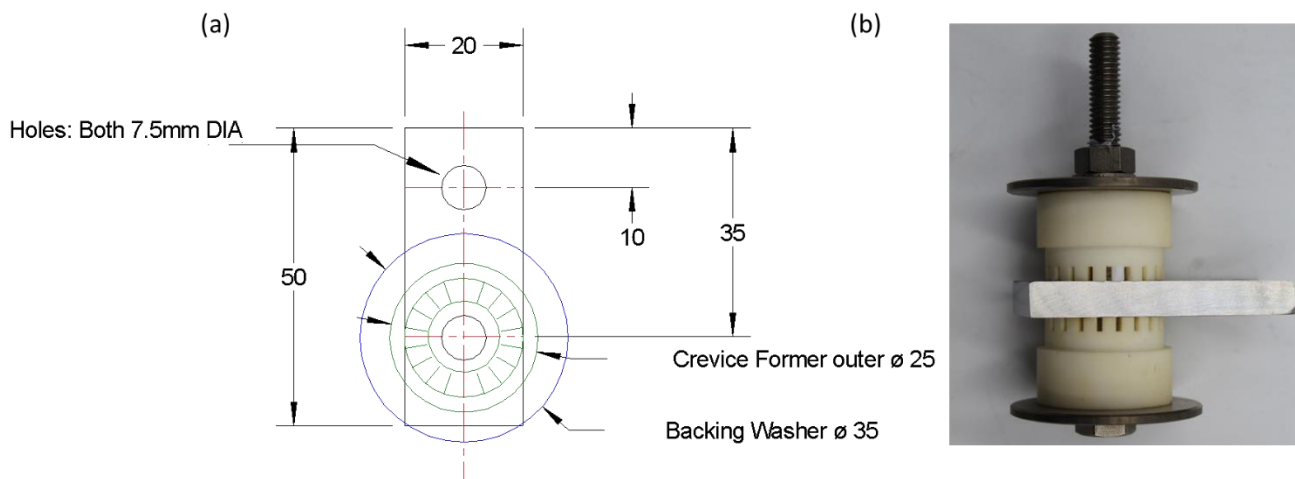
Drawing of crevice corrosion specimens and associated dimensions (a) and photograph of a crevice former assembled on a specimen (b).
